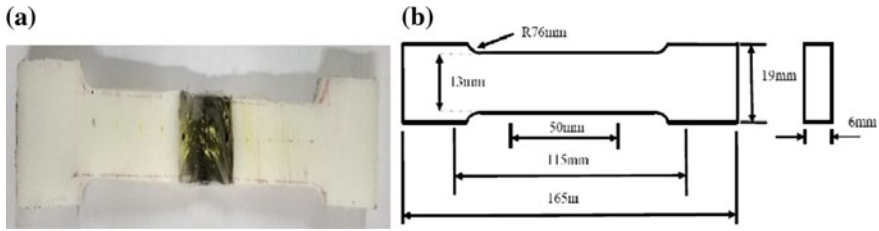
a Sample specimen prepared for tensile test and b dimensional view [15]
